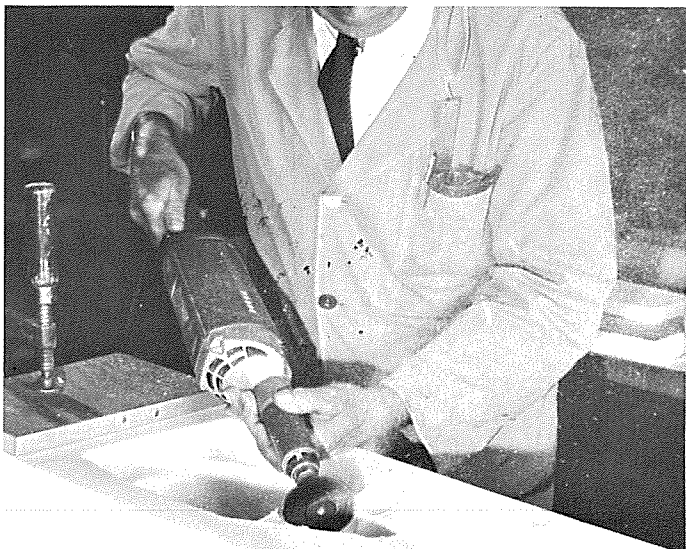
It saves much time to pre-cut hollows and recesses with a portable grinder or drill with wire brush insert. Finishing and surface smoothing is then done by hand with abrasive paper.
